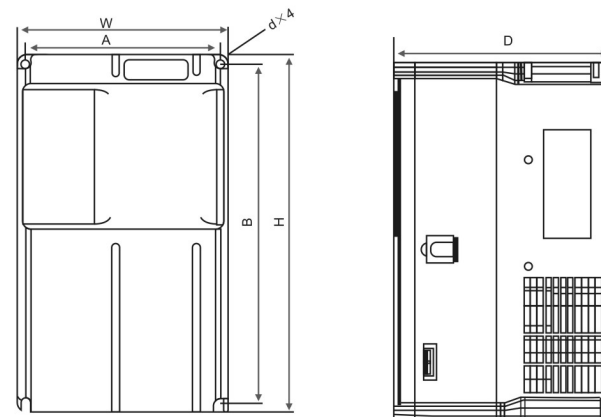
Schematic diagram of PTDF exterior size and installation size
